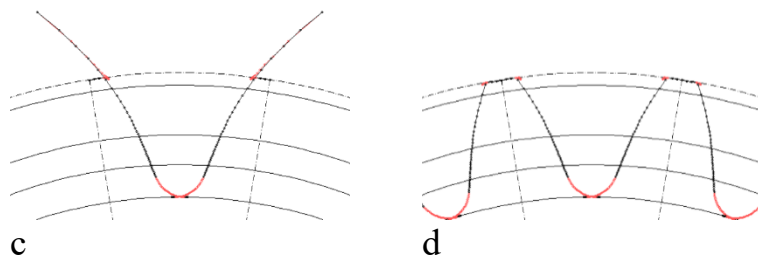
The shaping of the space between the teeth of the gear wheel with $m=5$ and $z=20$ by tool rack with a convex profile of the tooth flanks
